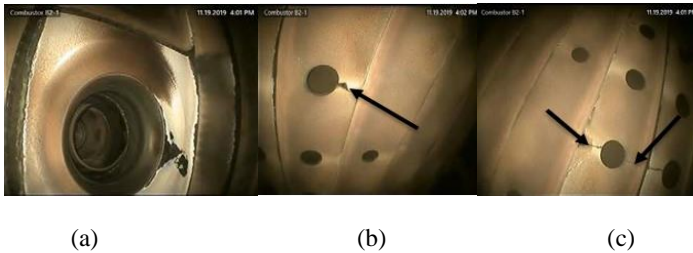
Combustion Chamber (Dome Assembly & Spectacle Plate)
